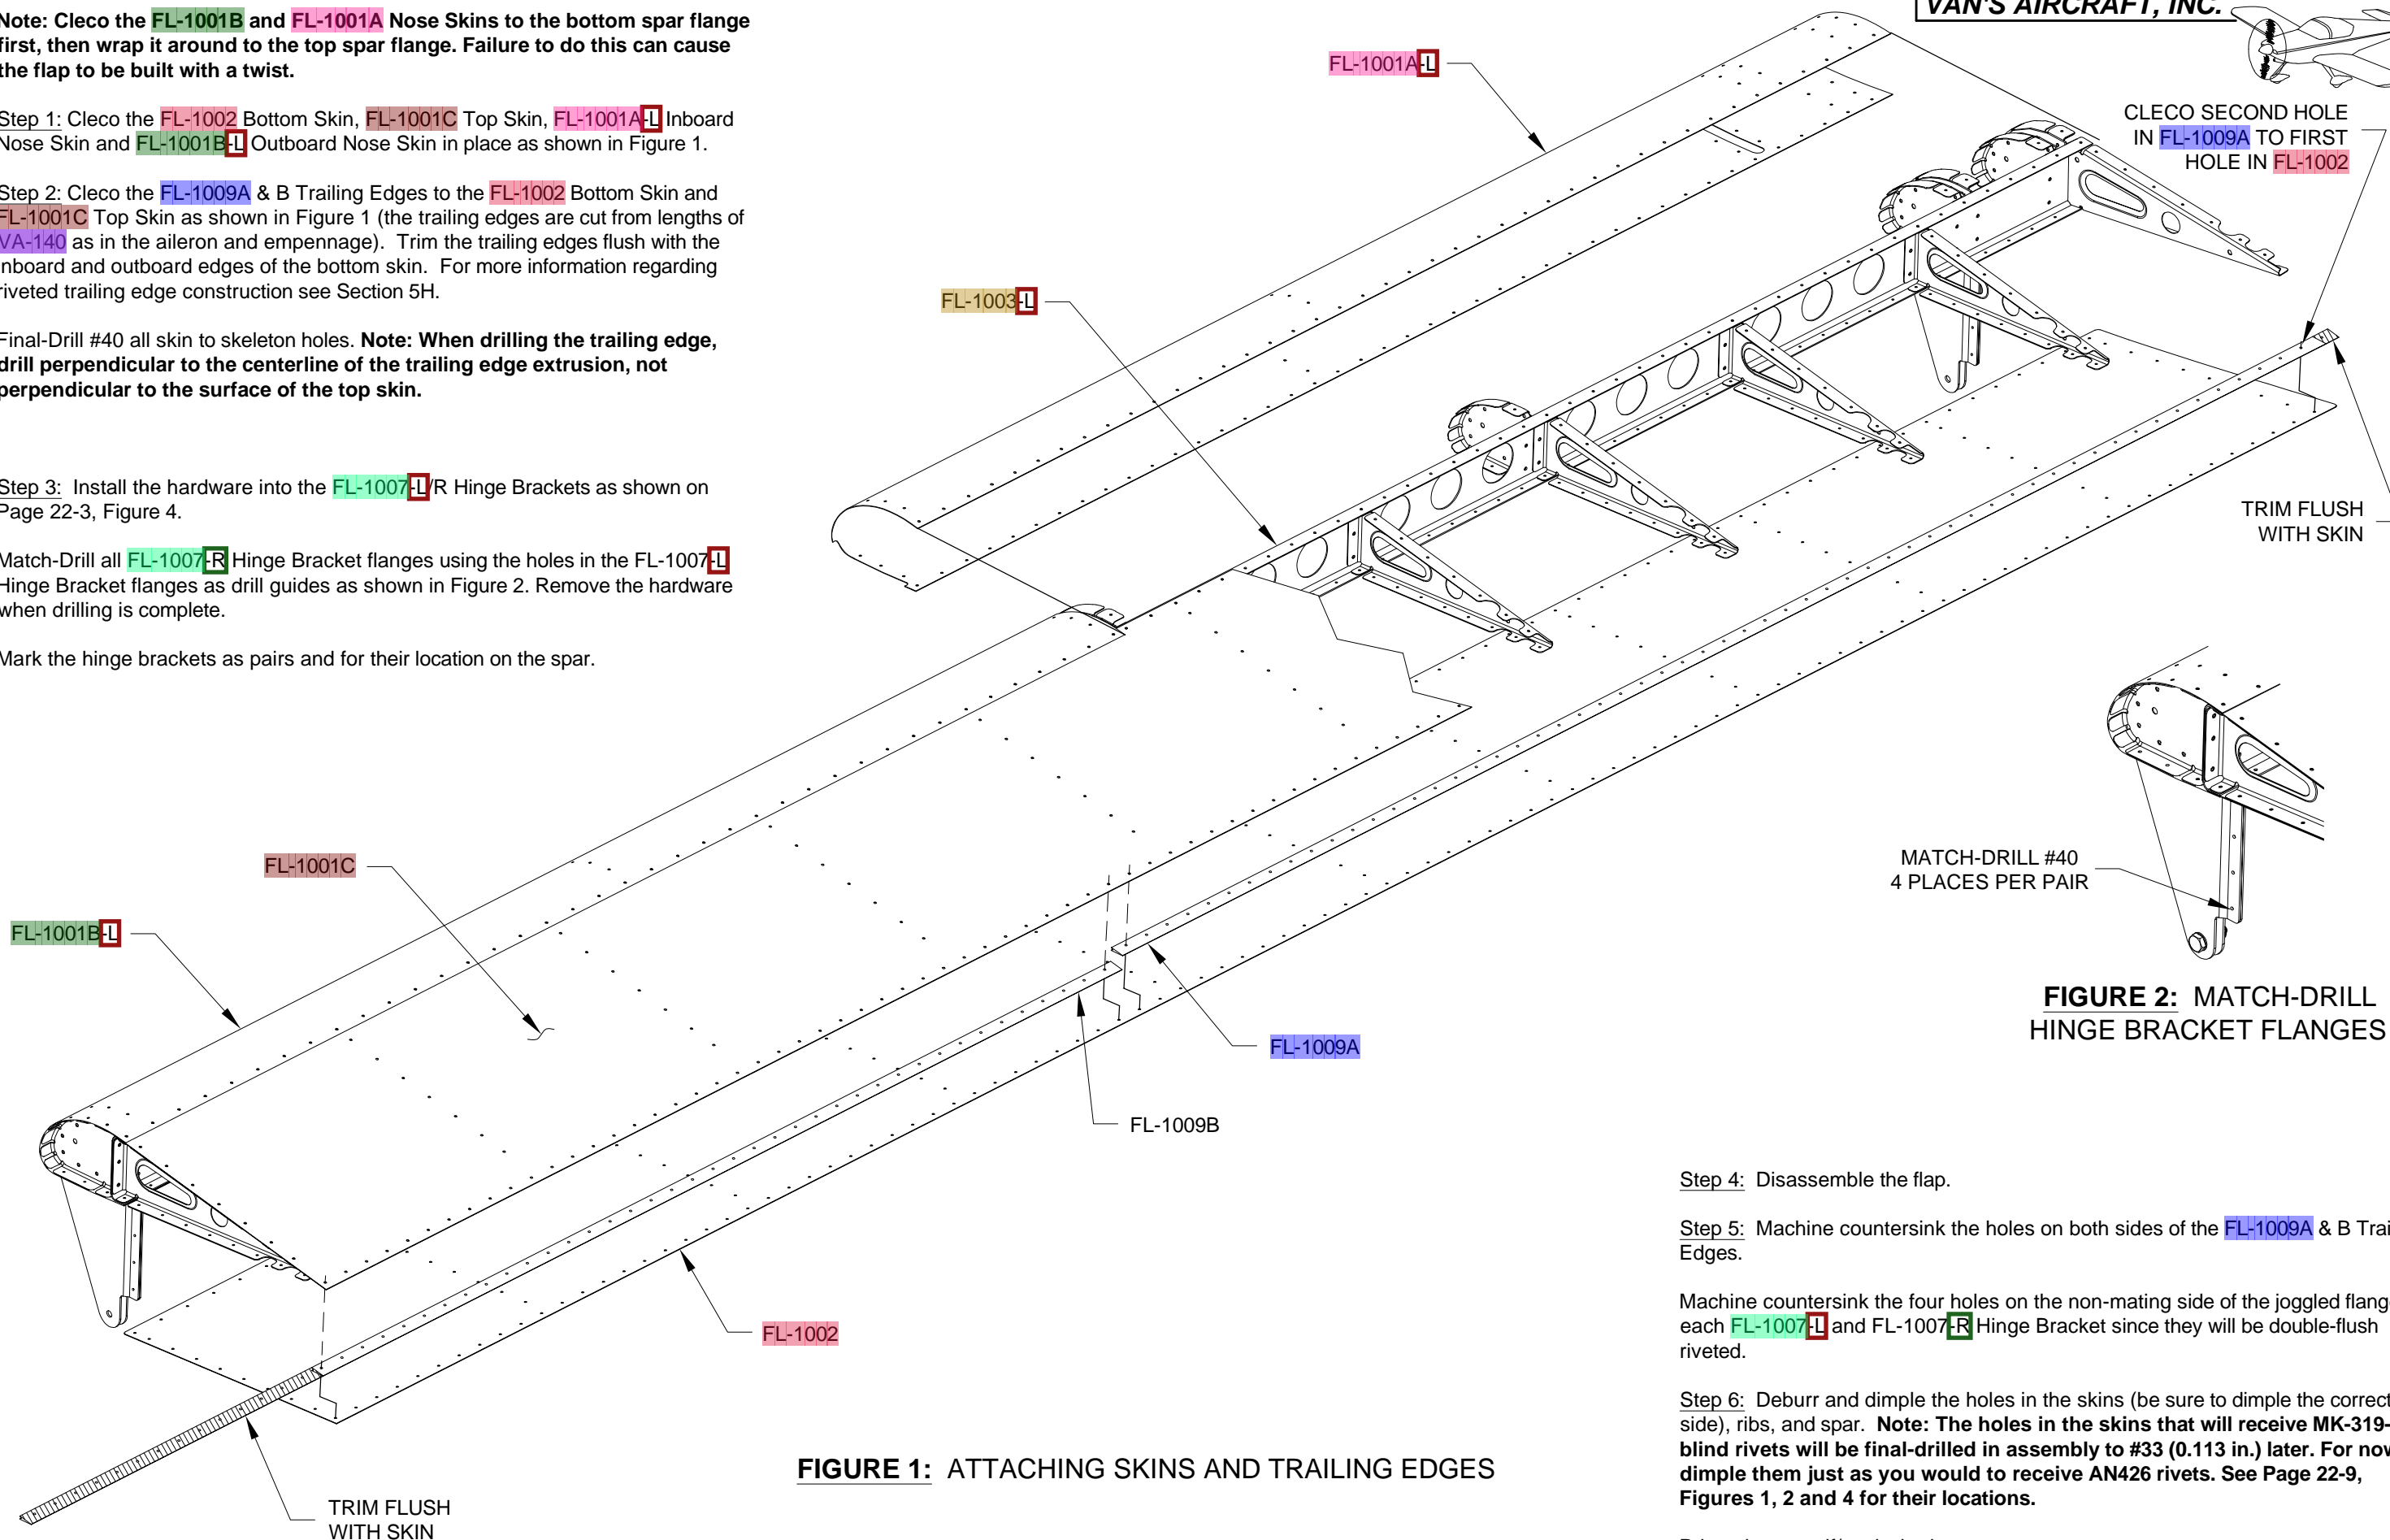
ATTACHING SKINS AND TRAILING EDGES
